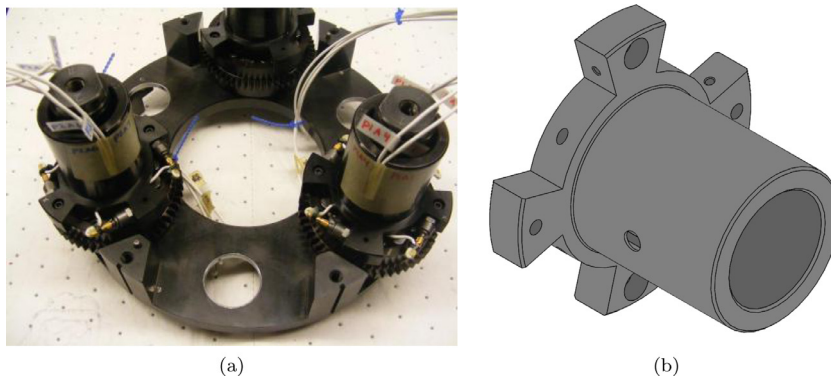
Tangential accelerometers attached (a) to planet gears through (b) rigidly mounted adapter flanges.
